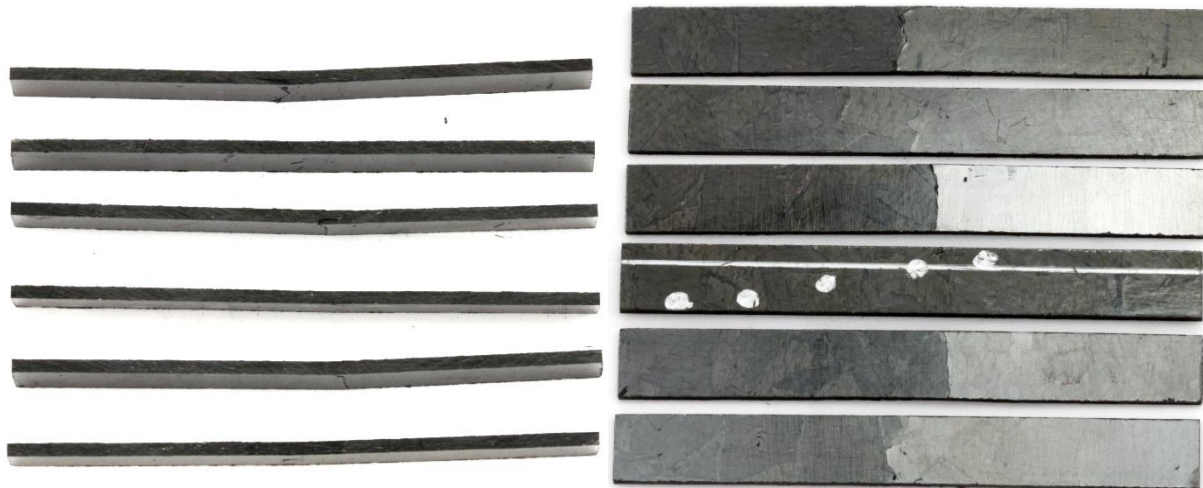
M26 Side view (left) and bottom view (right) 1-6 (top-bottom).
